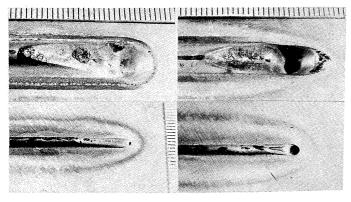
Bead appearances of the welds on type 304 stainless steel plate, 6 mm in thickness. The left weld was made without external magnetic field, 150 A, 32 V, 21 cm/min, 5.5 l/min, and right one was made with a cusp magnetic field, If 5 A, 150 A, 34 V, 21 cm/min, 5.5 l/min.
